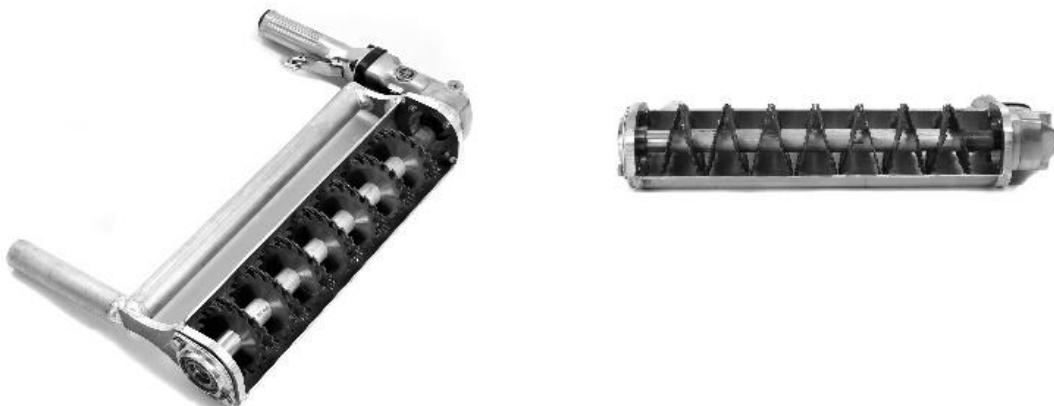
Scarifier with carbide cutting wheels (air driven)
